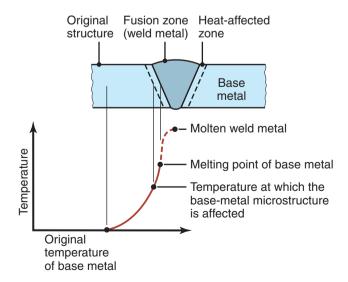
Characteristics of a typical fusion-weld zone in oxyfuel–gas and arc welding.
